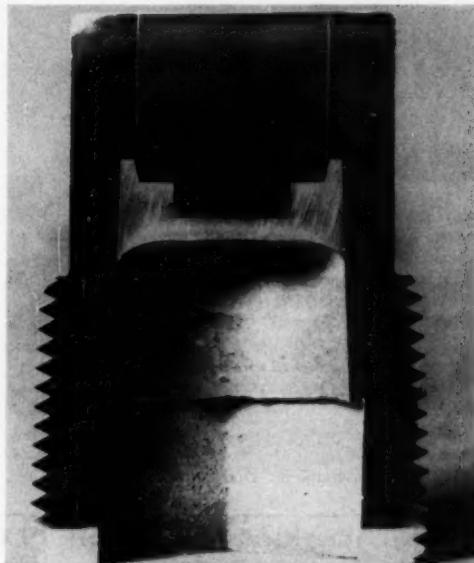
Cross-section of boiler drop plug. Rolled bronze button is held in place in casting by means of a 0.003-in. film of metal that softens at 540 F.
